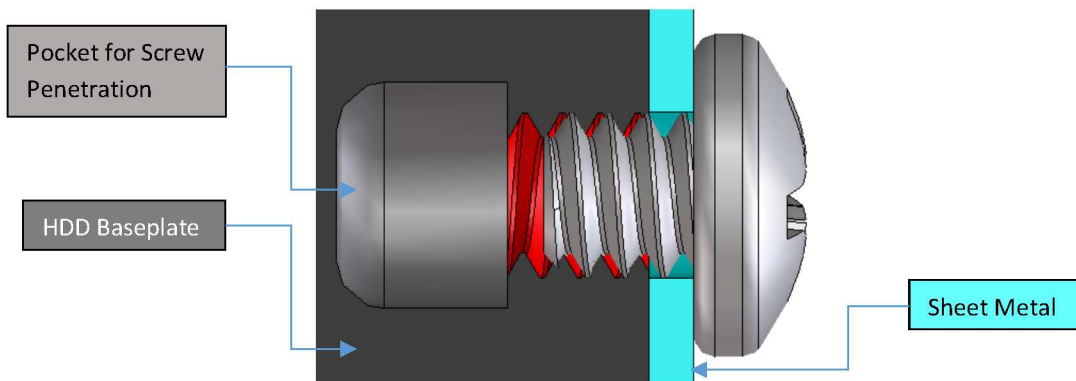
Option 2 – Side mount hole, 6-32UNC X 1/8" (2.8 threads engagement)
